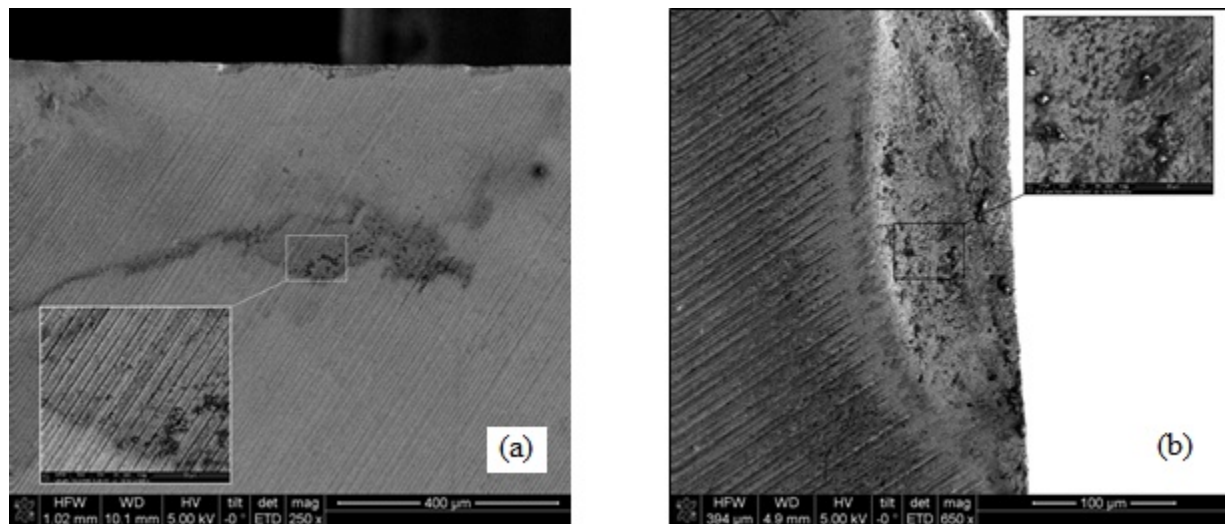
SEM micrograph of tool for treatment 120 SFM and 0.005 IPT showing welded micro-chips (a) Rake (b) Flank.
